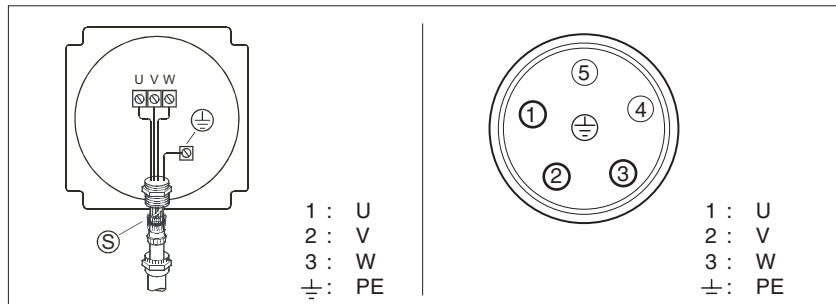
Motor cable connected to motor with terminal box or plug
